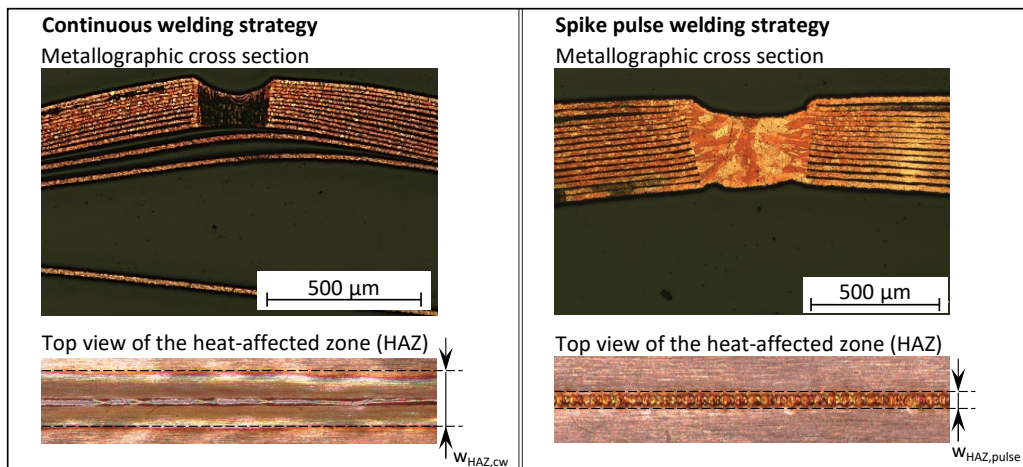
Metallographic cross sections of the weld seams (top) and top view of the weld seams with highlighted heat-affected zone (HAZ) (bottom)
